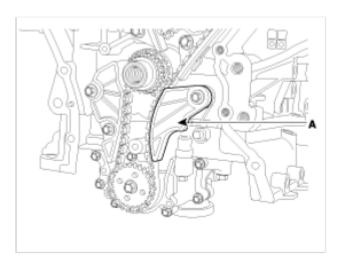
Identifying Oil Pump Chain Tensioner Assembly
